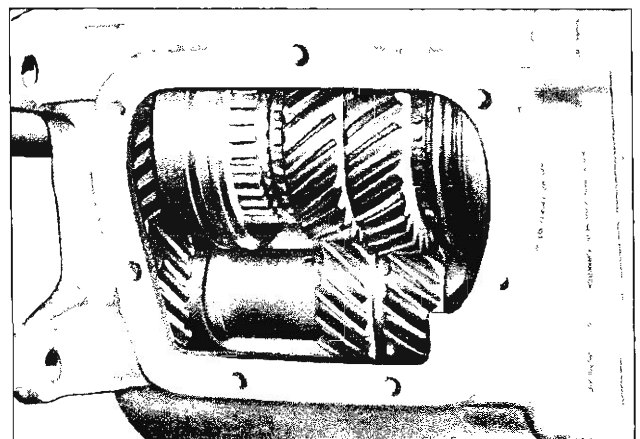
M—Third and Fourth Speed Synchronizer Clutch Sleeve in Fourth Gear Position
